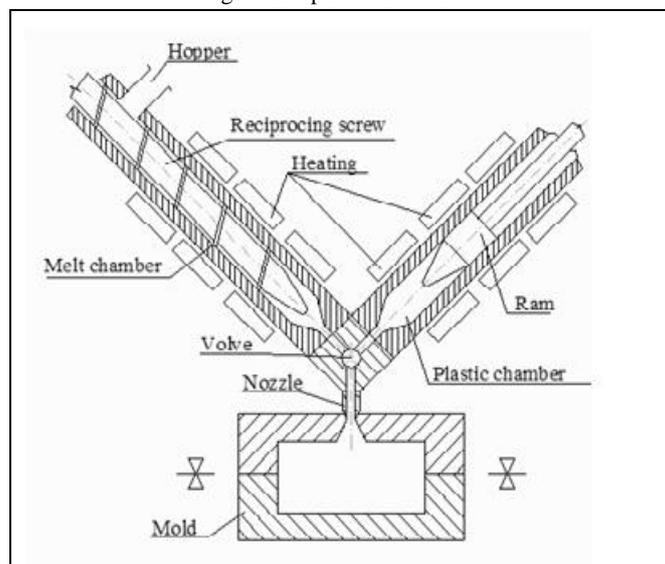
Schematic of rep rt9 Vertical Injection Mould Machine.
